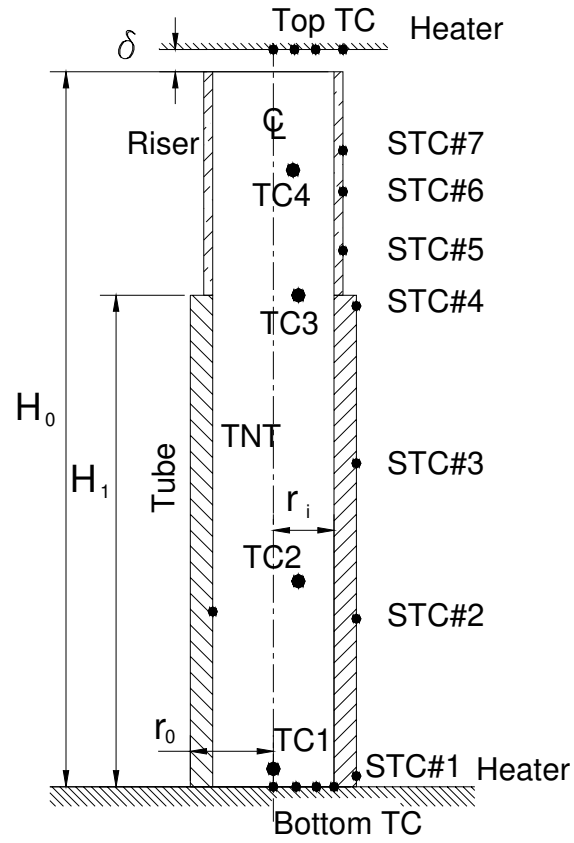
Schematic diagram of the assembly for casting of TNT in a cylinder.
